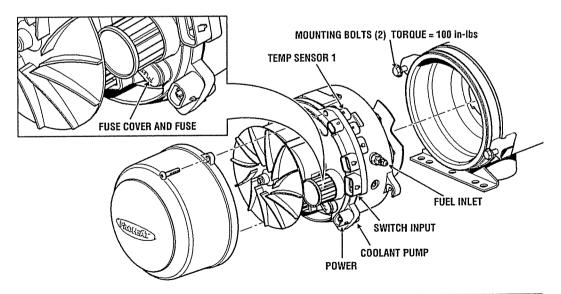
Burner Head Removal and Motor Mechanical Check
